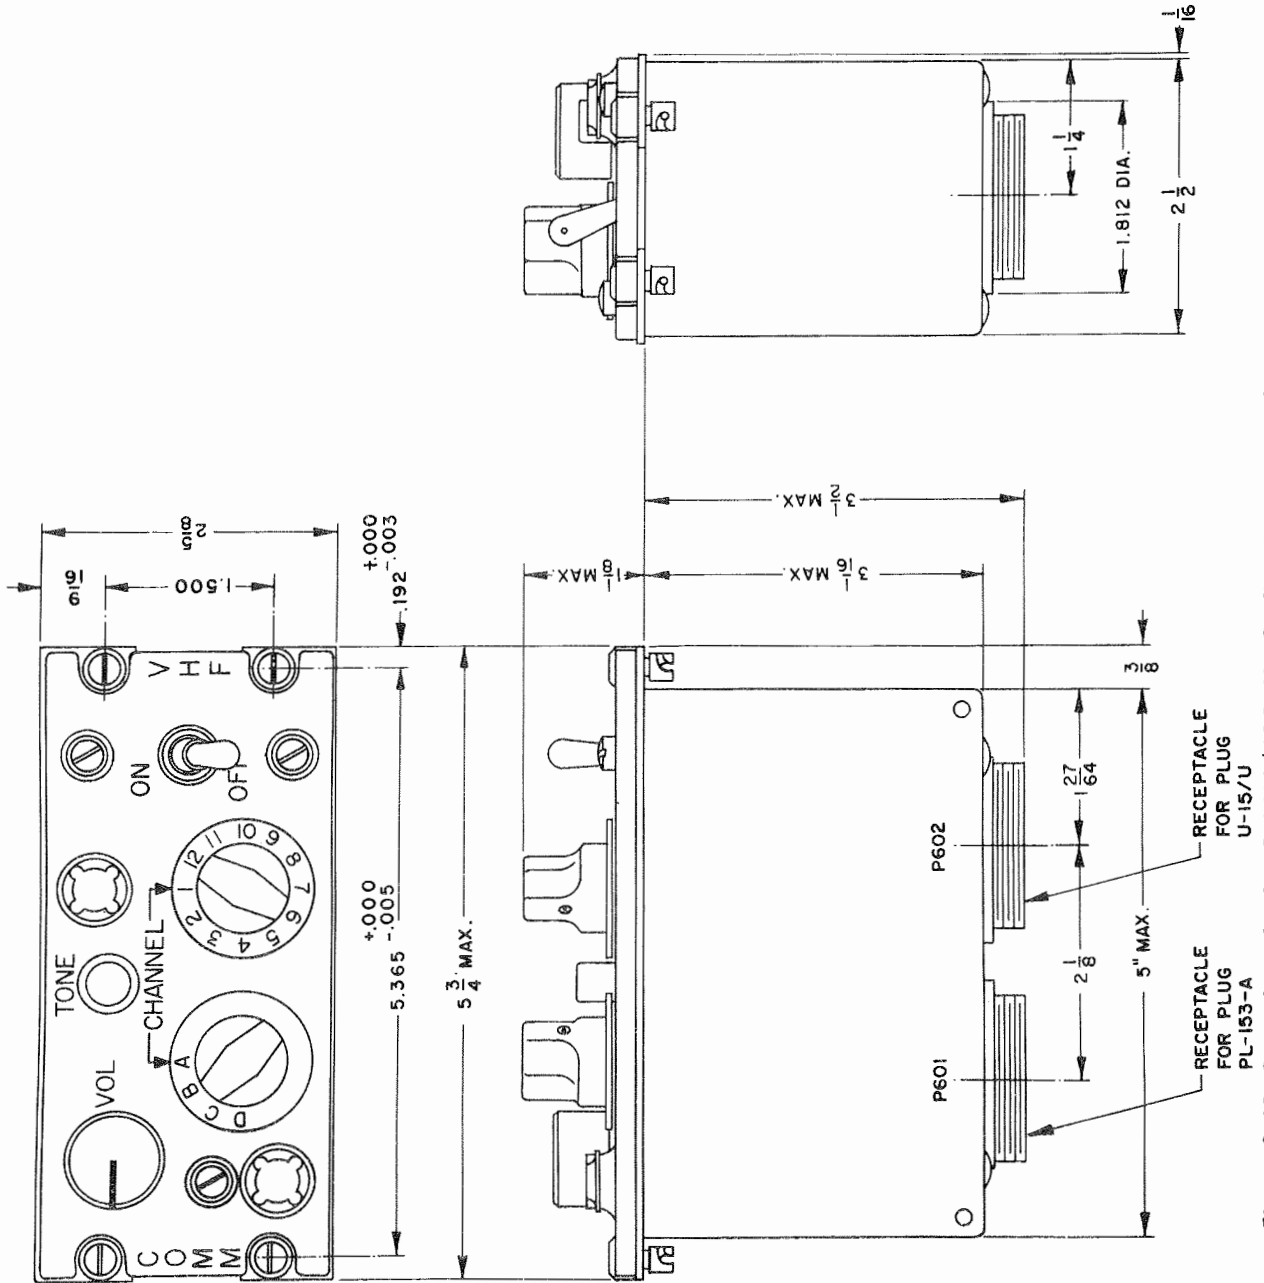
Control, Radio Set C-1400/ARC-49—Outline Drawing and Mounting Dimensions
